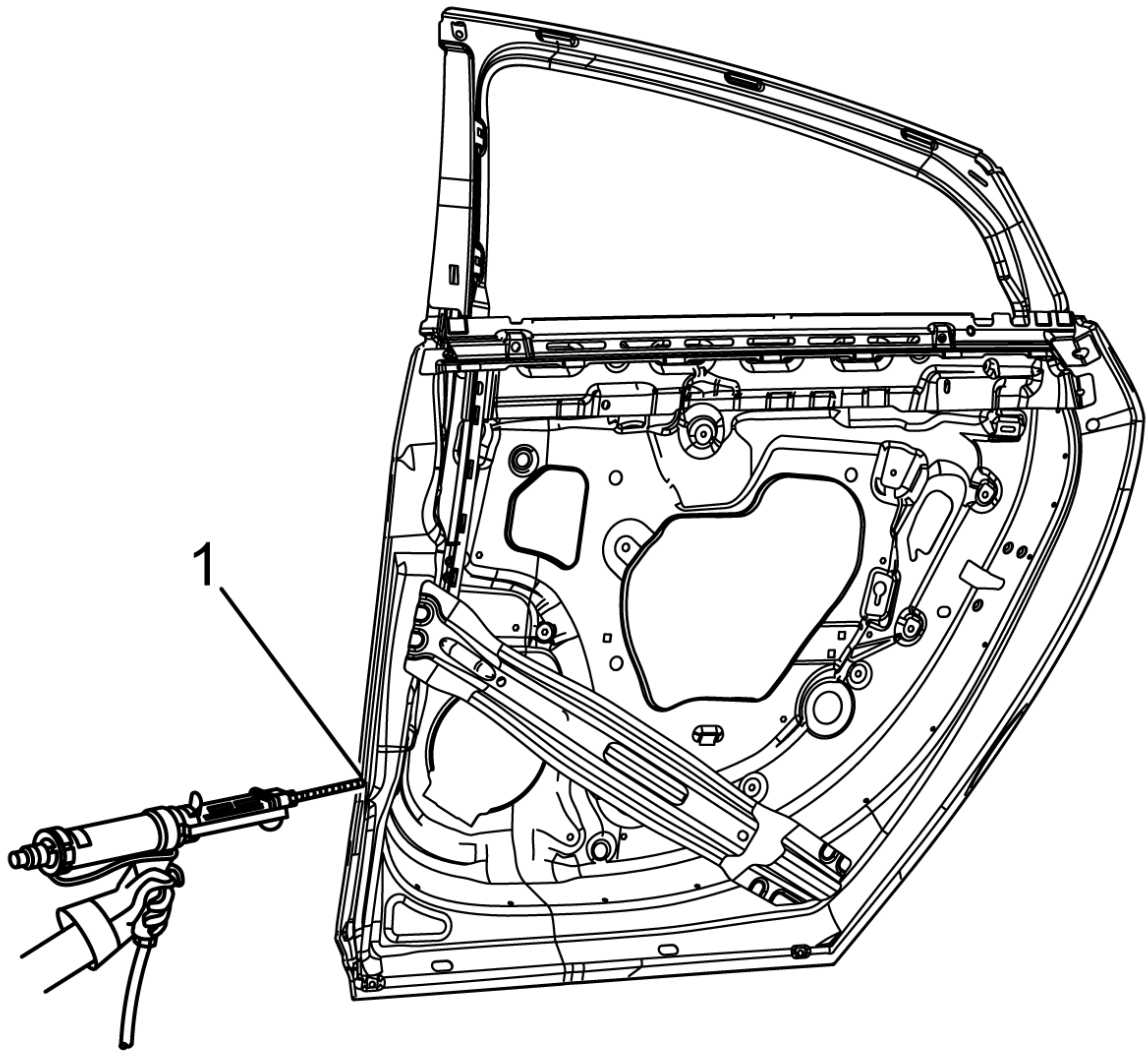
Apply Bead Of Metal Panel Bonding Adhesive To Mating Surfaces
